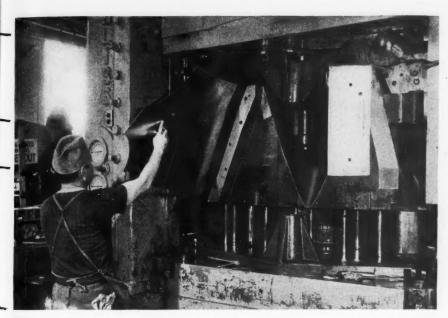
The Forming Die for the Single-Piece Skin was Loaded from One End in order to Utilize the Full Stroke of the Press
